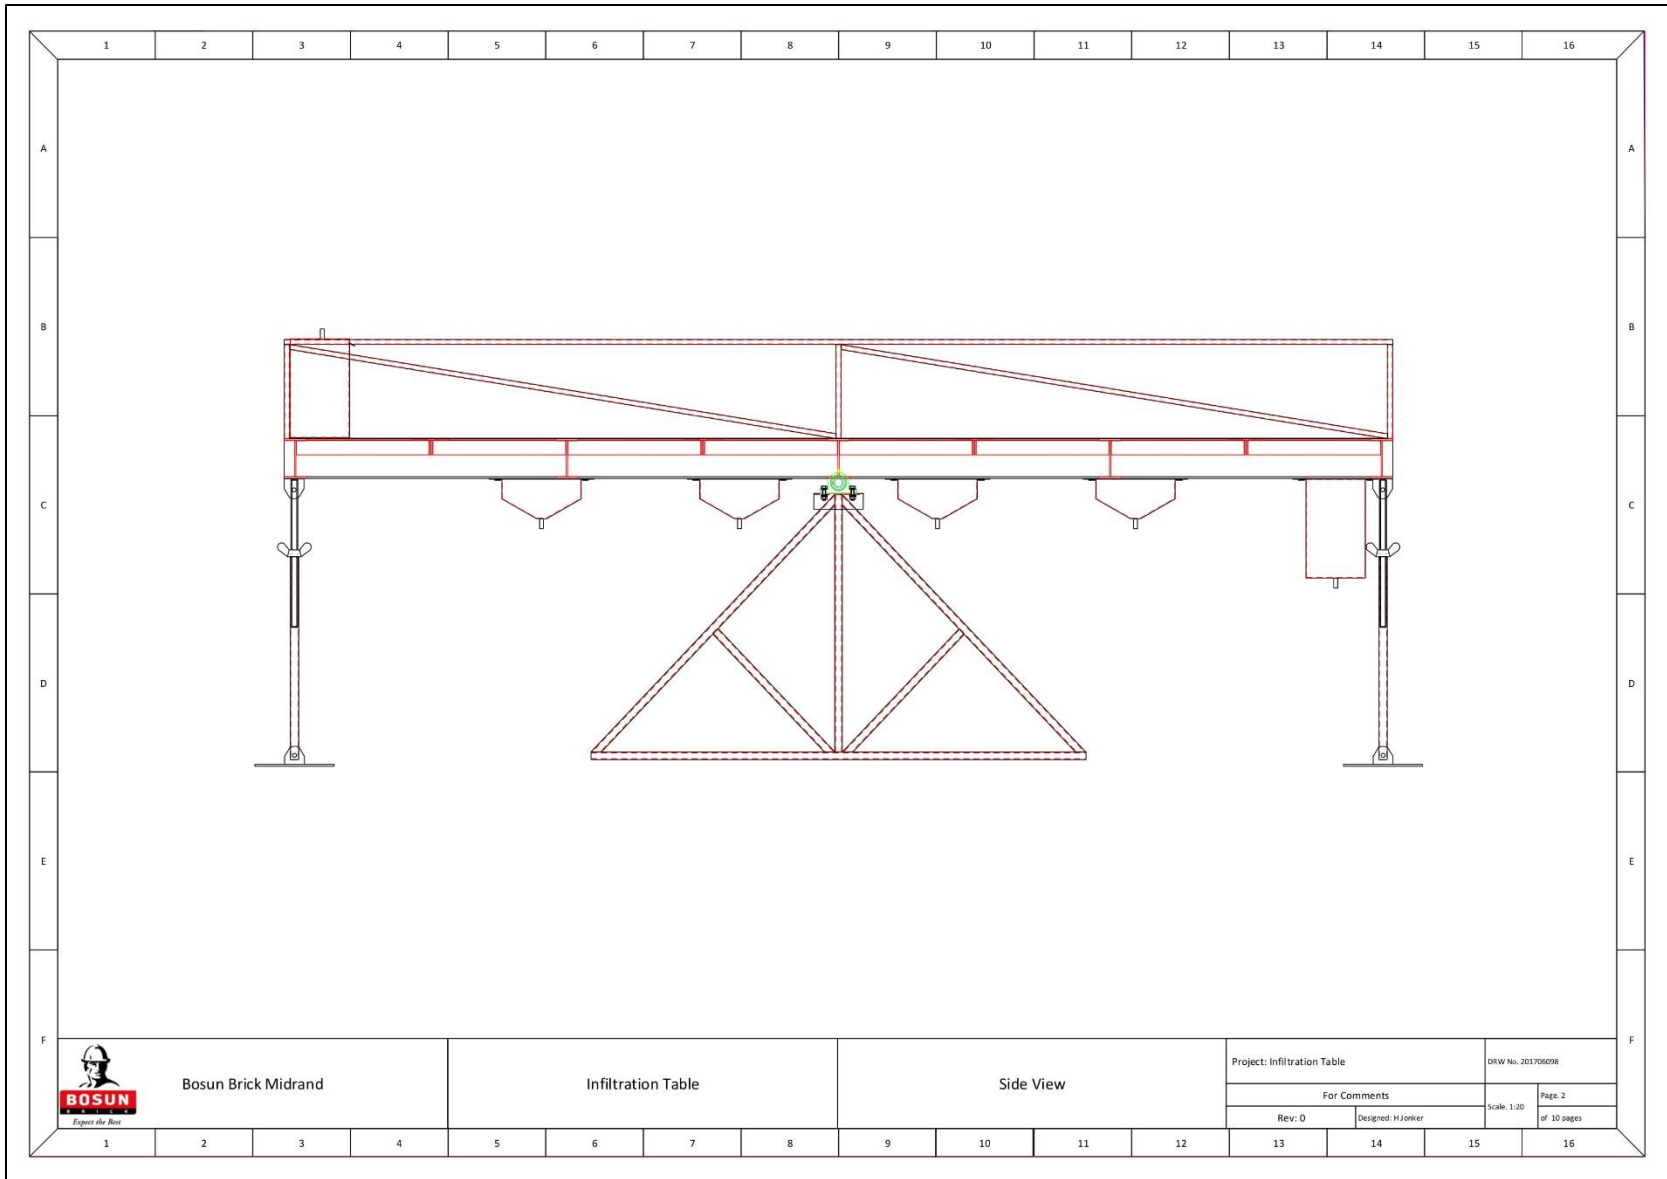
The side view of the Infiltration Table Apparatus design drawing. (Bosun Midrand, 2017)
